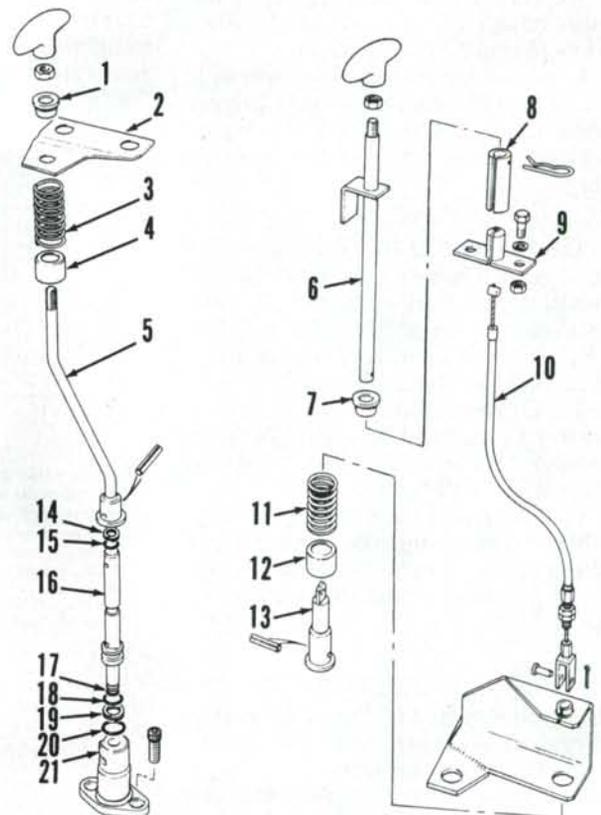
Exploded view of typical dump valve assembly used on all models except 1594 and 1690. Control linkage shown is for cab equipped tractor. Control linkage will vary between models.
